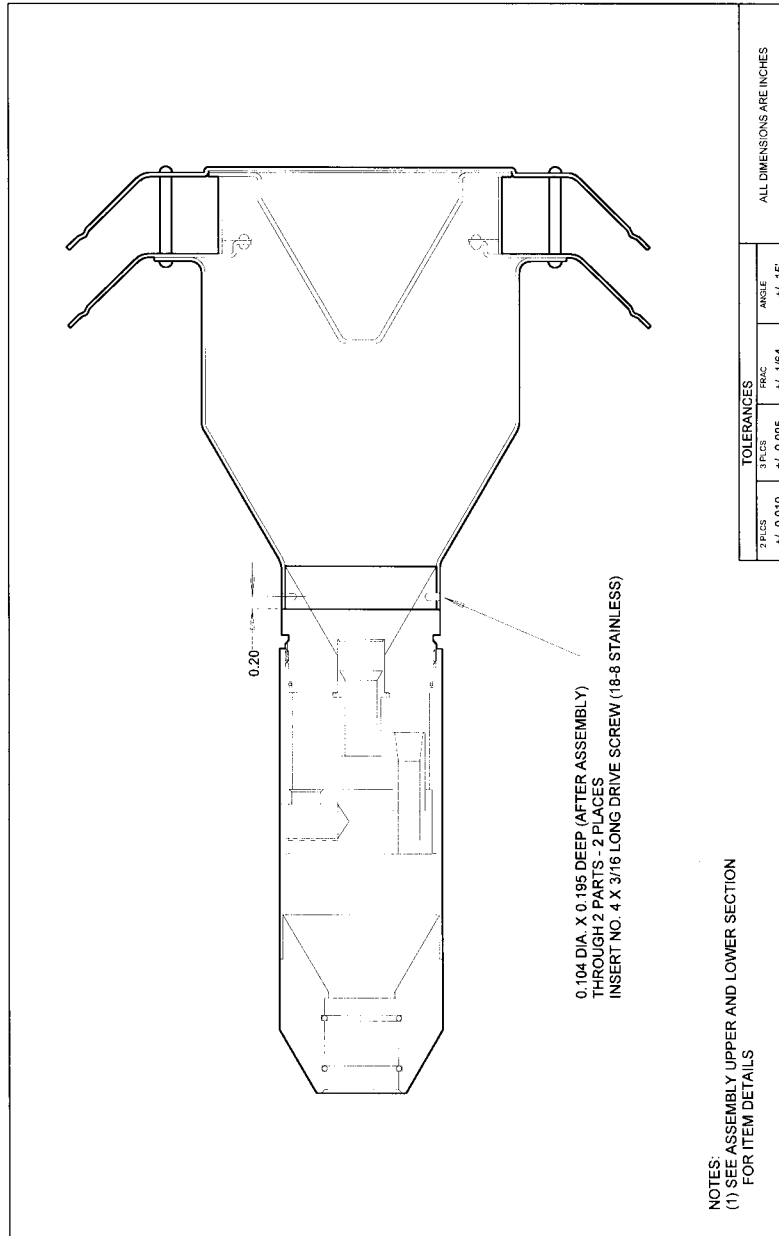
10-MICRON ASSEMBLY, UPPER SECTION
